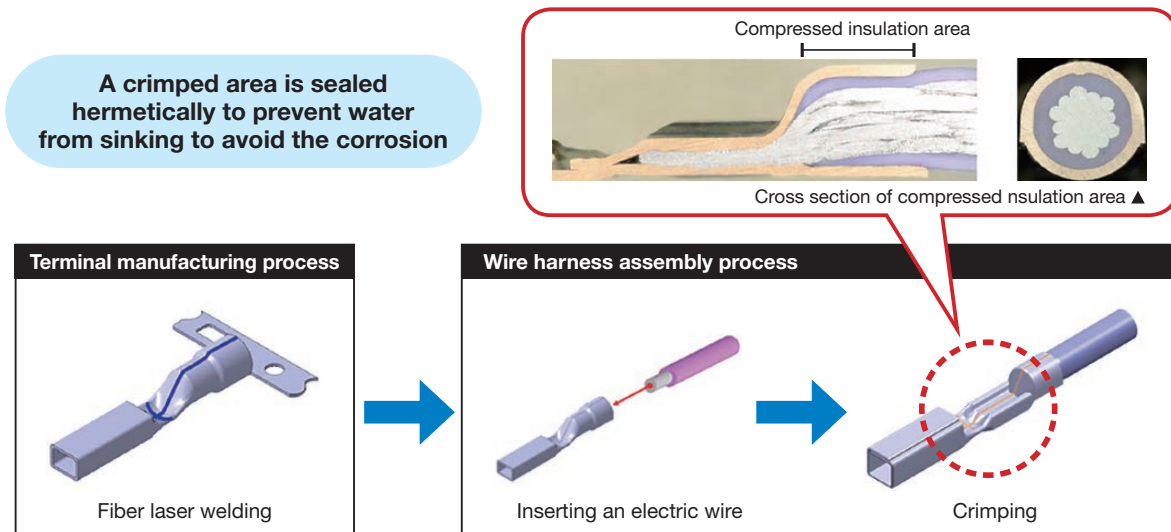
Sectional structure of the crimped terminal of “α terminal series” and its manufacturing and assembly process.
